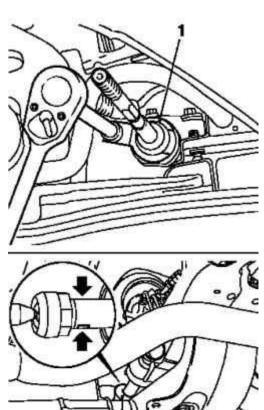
Otsoedineie tie rod: 1 - a special tool, 2 - Wrench
